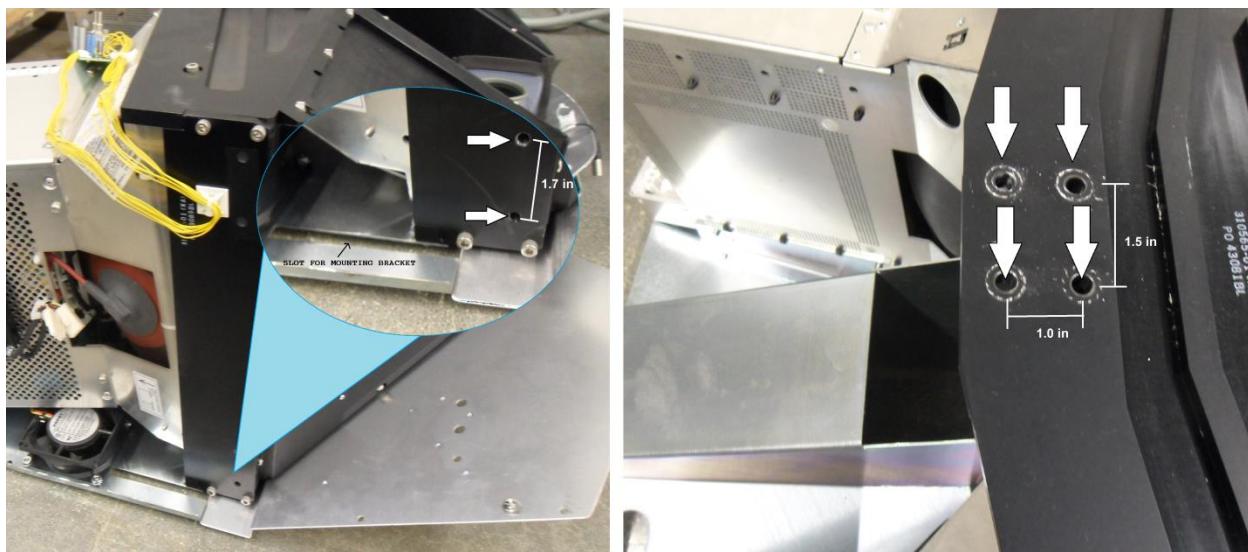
HRSV MOUNTING POINTS- LEFT: SIDE MOUNTING HOLES. RIGHT: TOP MOUNTING HOLES.
